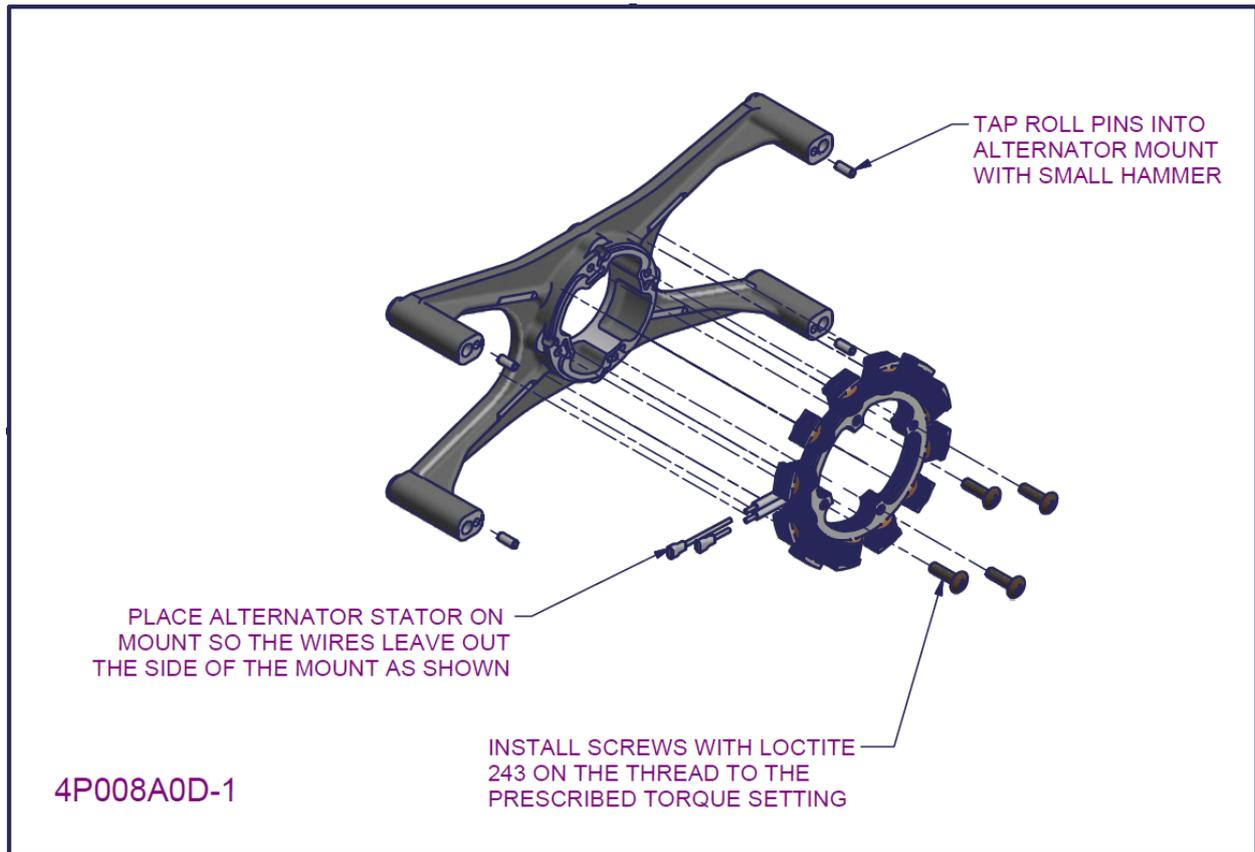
2200/ 3300 alternator stator subassembly 1
